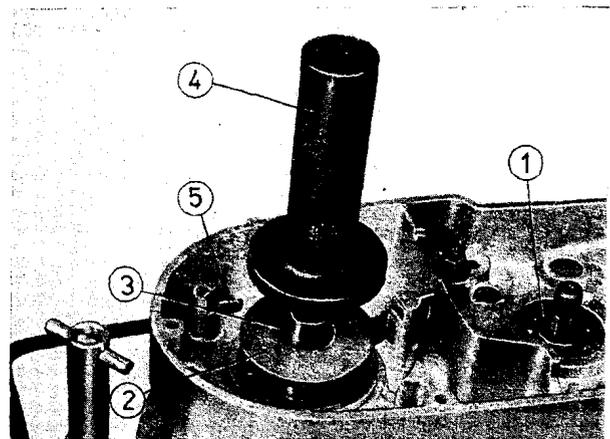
Mounting the packing ring D 25 x 72 x 7
